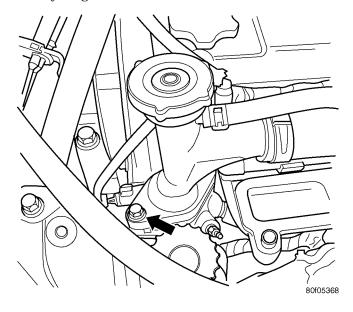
THERMOSTAT HOUSING - 2.4L TURBO
